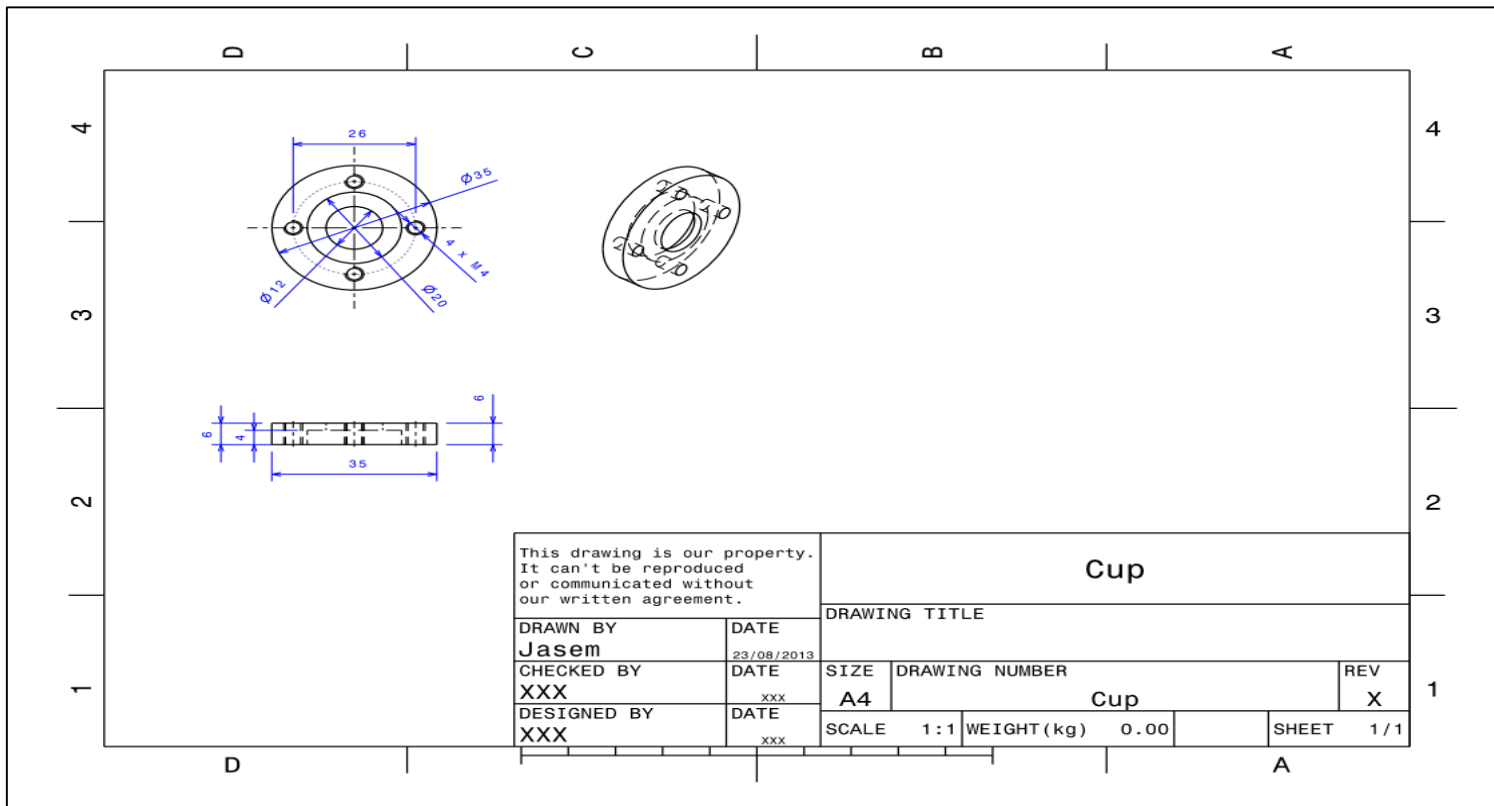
The seal cup for the hole in which the main shaft enters the lubricant container.
